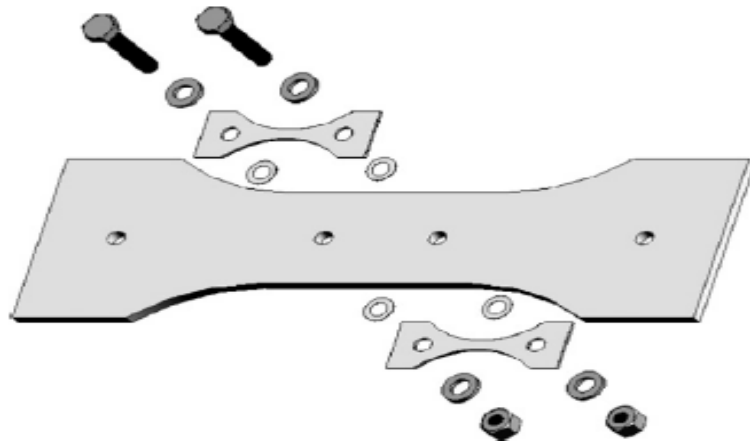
3-D image of the sensor attachment to the specimen for fatigue test. [20].
